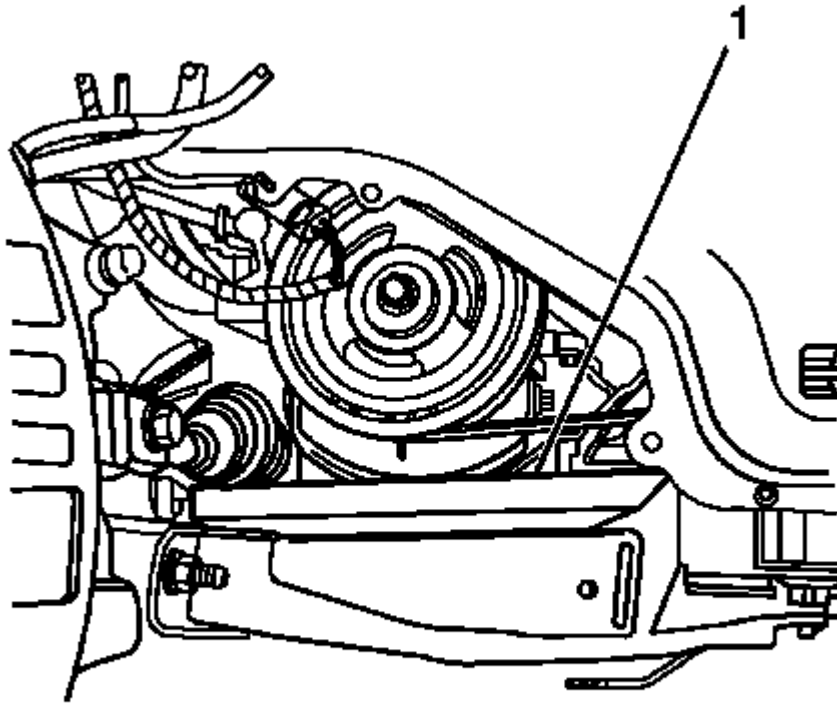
Identifying Block Of Wood Between Frame & Engine Oil Pan
